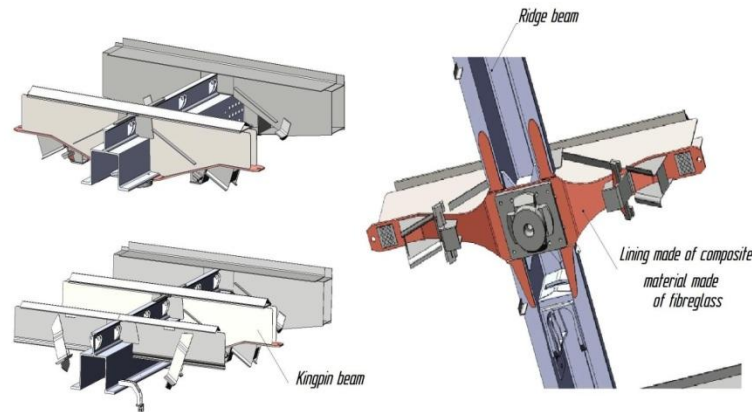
Proposed design for counteracting corrosion of the car body pivot assembly
